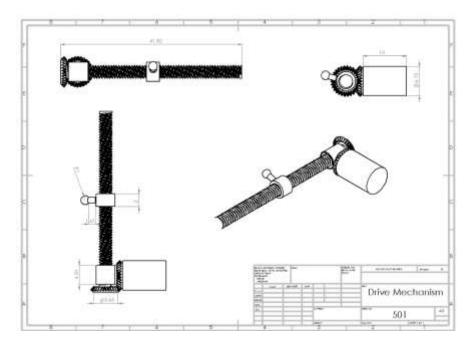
Annotated drawing of lead screw mechanism with bevel gears in final cranial distraction device
